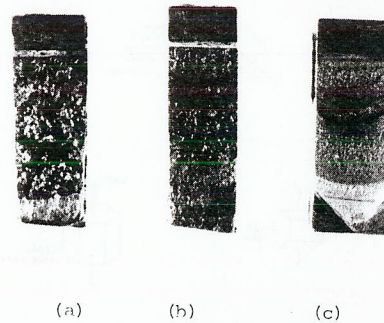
The fatigue fracture surfaces of α -brass specimens with grain sizes a) 714 μm , b) 246 μm and c) 51 μm .
